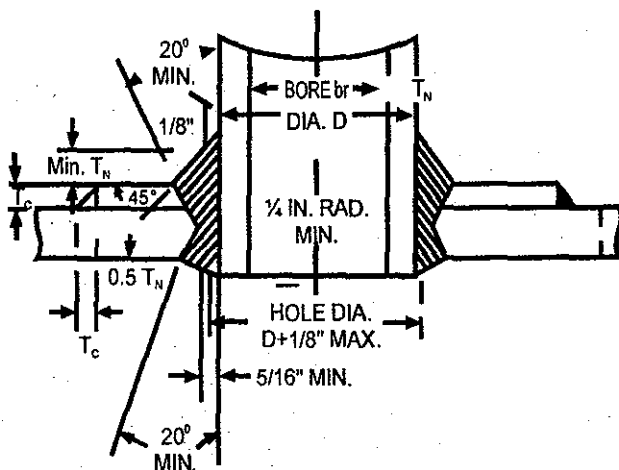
MINIMUM WELD ATTACHMENT FOR STANDPIPES OVER 5 IN. BORE REQUIRING COMPENSATION PLATES
